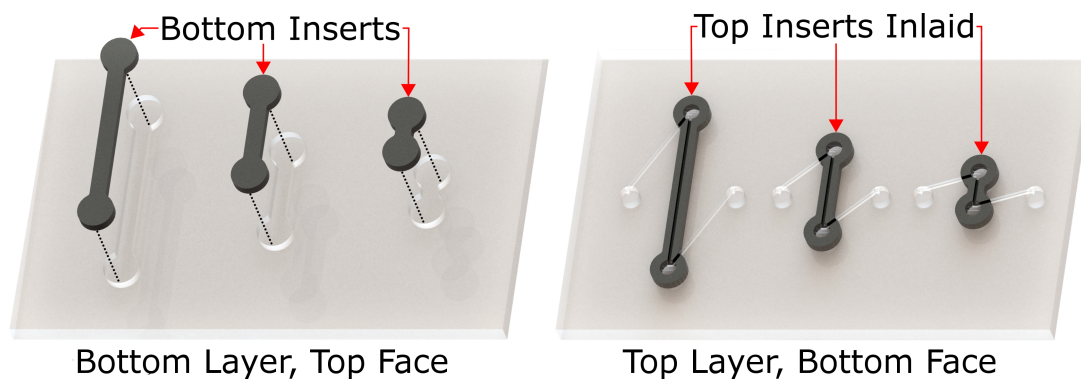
Triple inlay chip CAD interior view. An exploded view of the bottom layer is shown (left) where opaque inserts are aligned to cavities in the clear PMMA sheet. The seamless inlaying of the inserts into the sheet is shown (right) on the bottom of the top layer.
